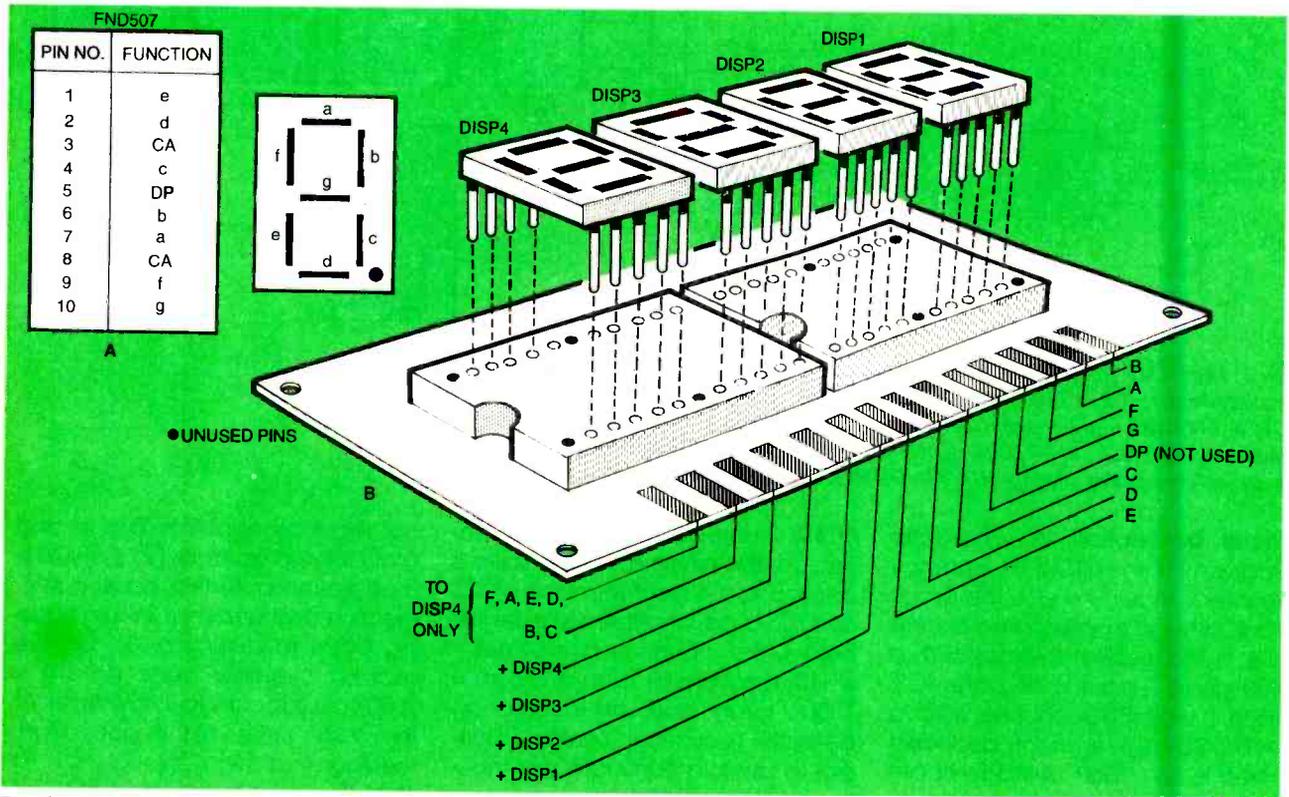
The four 7-segment modules of the display board mounted in a pair of 24-pin IC sockets positioned end-to-end, are shown here. Note the locations of the four unused pins on each 24-pin socket when wiring the sockets.
